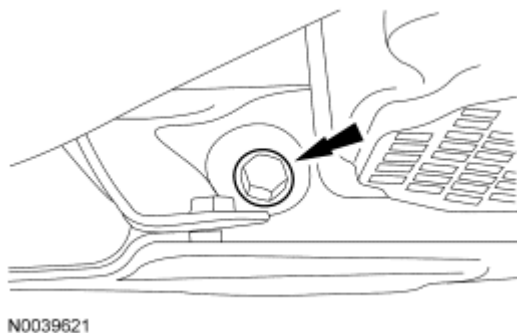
Locating Lower Control Arm-To-Subframe Bolt
